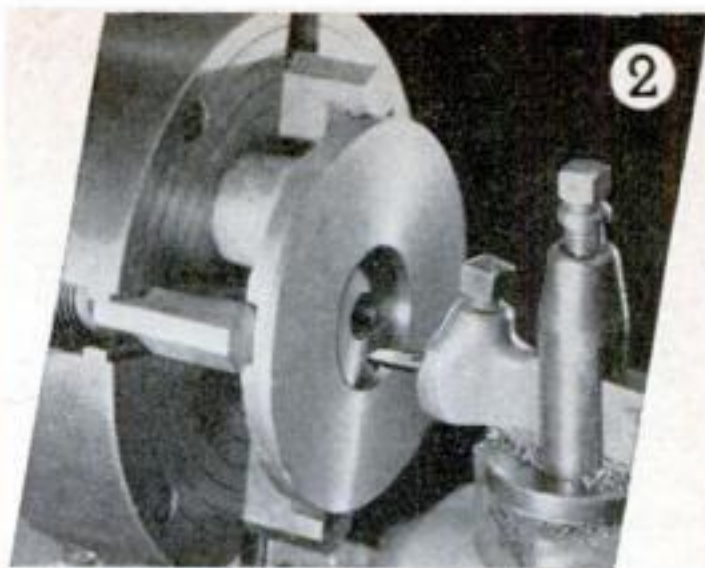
shows the turret head being machined to fit the base casting. While in this position, a fine circle is scribed, and the five holes for the indexing pin are accurately
